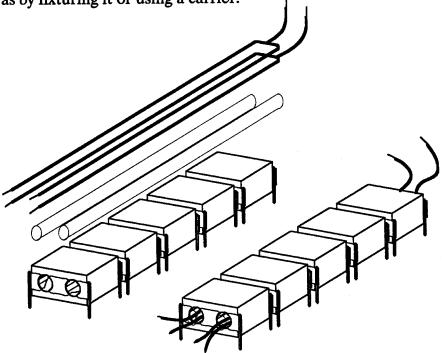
A row of Matrix Transformer Modules can be inserted in a printed circuit board, with their through holes aligned. A sleeve is slipped through the aligned holes, and the primary winding is installed. The DC input power goes on one end, the switching FET's on the other.
